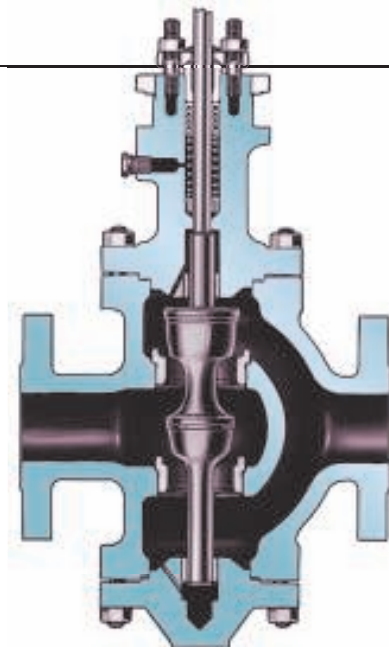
The typical globe-valve design prior to the 1960s included a heavy, thick-walled body casting with two internal ports and a top-and-bottom guided valve plug
